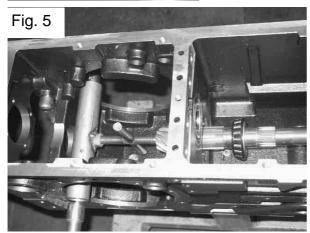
shows how pinion assembly continues with the aid of a positioned, which keeps the pinion in position while the second taper bearing is mounted.
